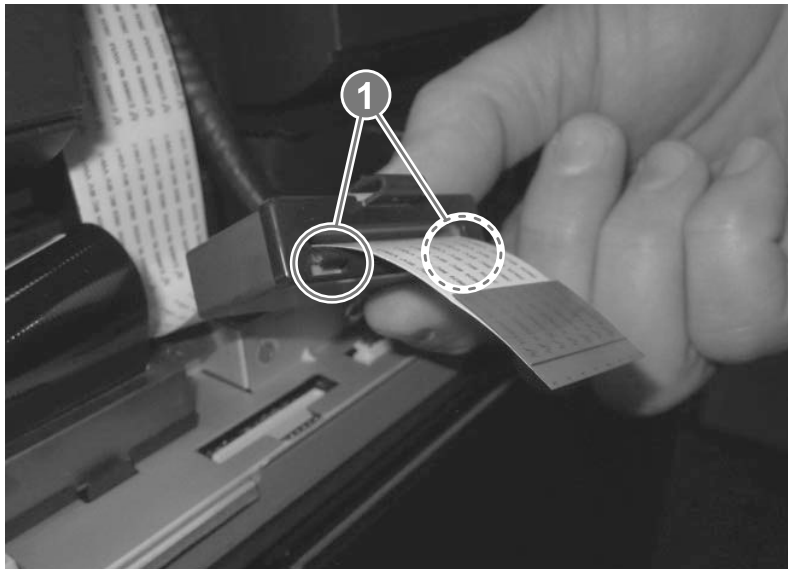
Transfer the SCB to the replacement scanner assembly (6 of 6)
